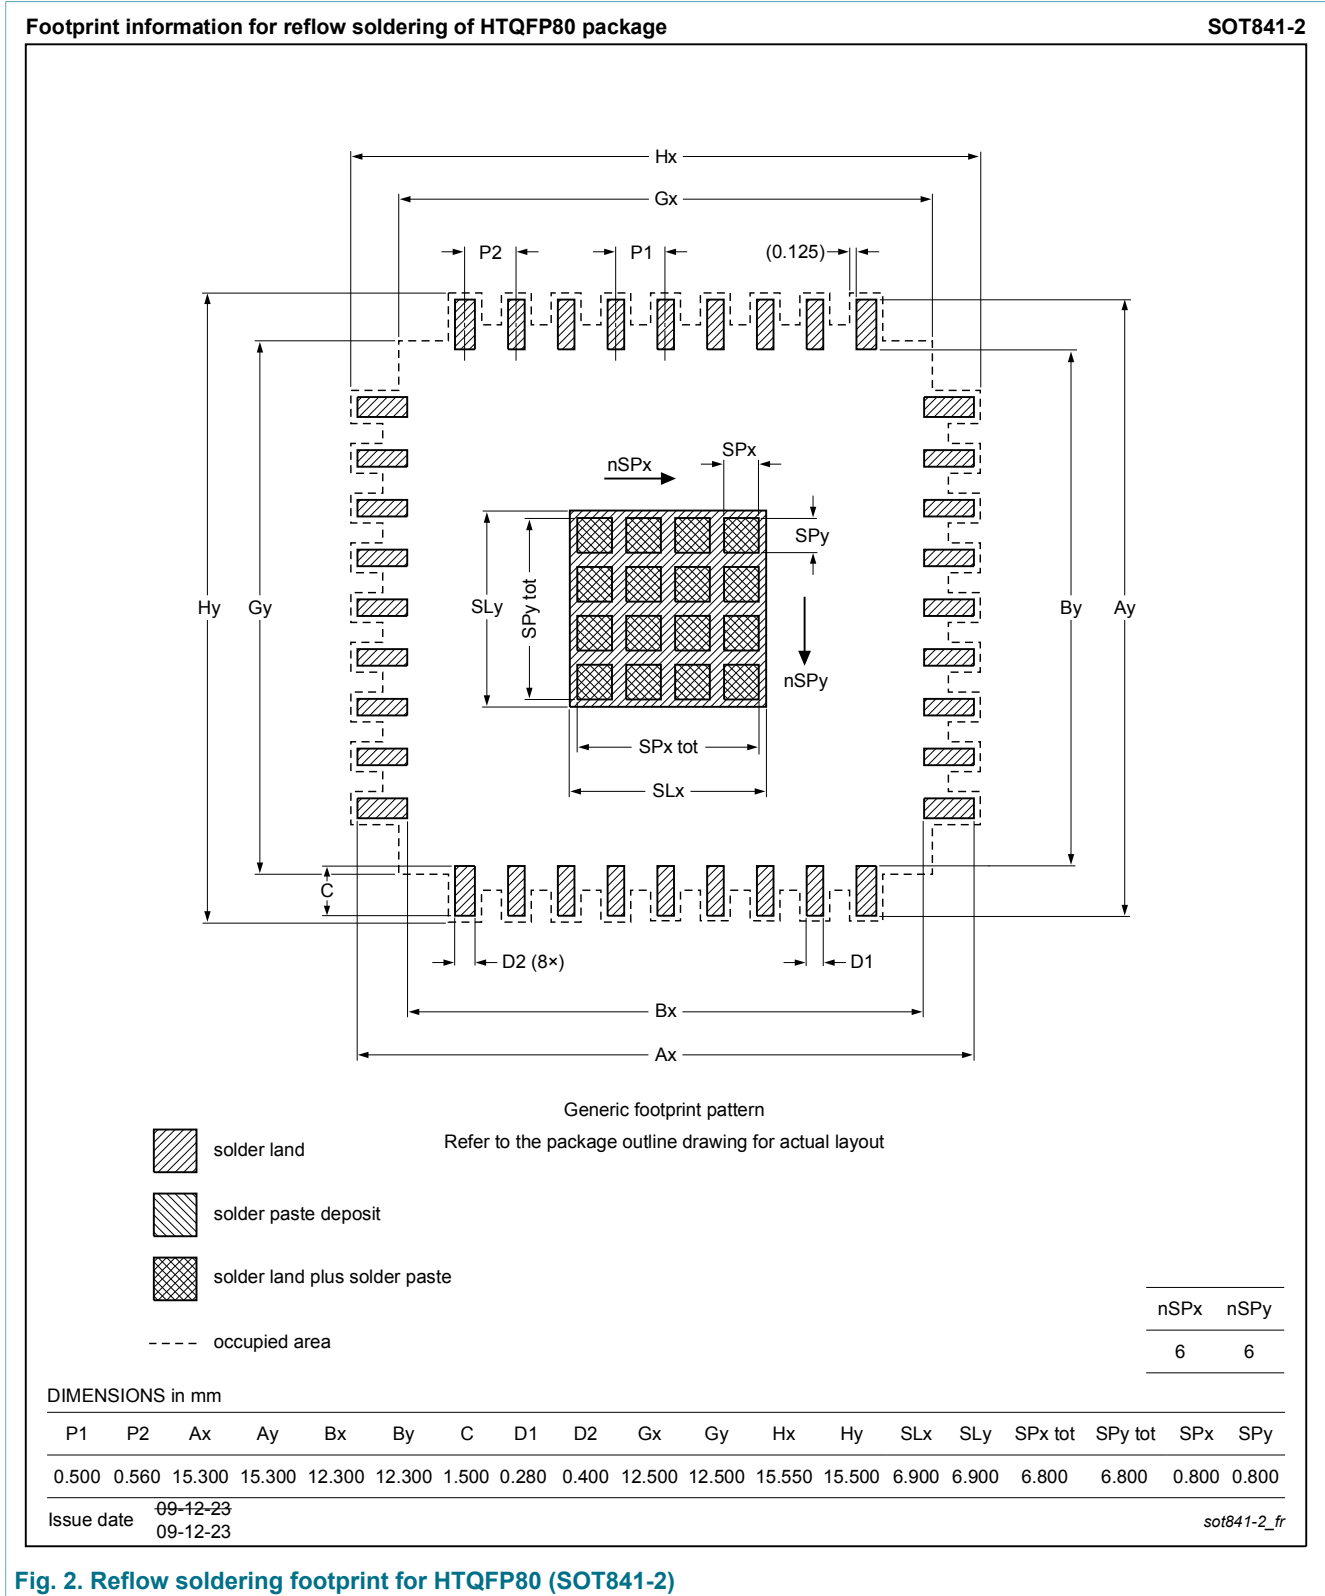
Reflow soldering footprint for HTQFP80 (SOT841-2)
